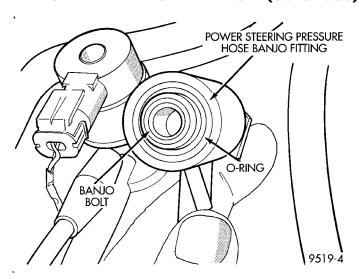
O-ring Installed On Power Steering Hose Banjo Fitting
